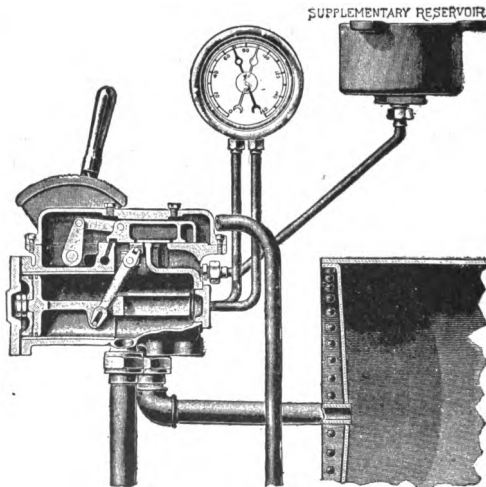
shows the construction. Figs. 1 and 2 are external views; rear end and side, respectively. Fig. 3 is a cross section through the feed valve (rear view). Fig. 4 is a section through the side, showing travel of slide valve 114 and how graduating valve 110 is controlled by piston 104. Fig. 5 is a cross section through the slide valve (front view). Fig. 6 is a plan of the valve seat. Fig. 7 shows the face of the slide valve. Fig. 10 shows the supplementary reservoir.
